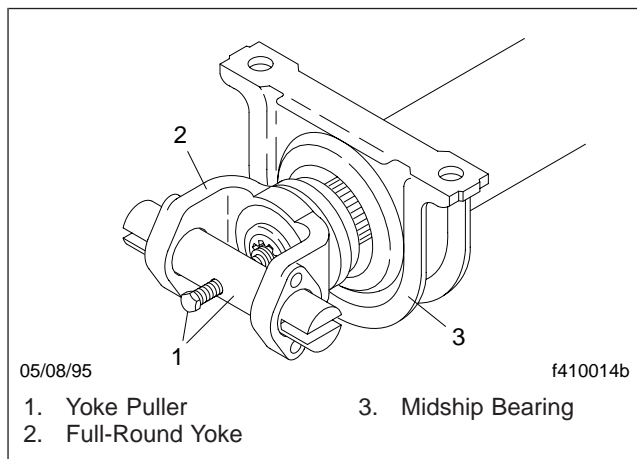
, Remove a Full-Round End-Yoke from a Coupling Shaft
